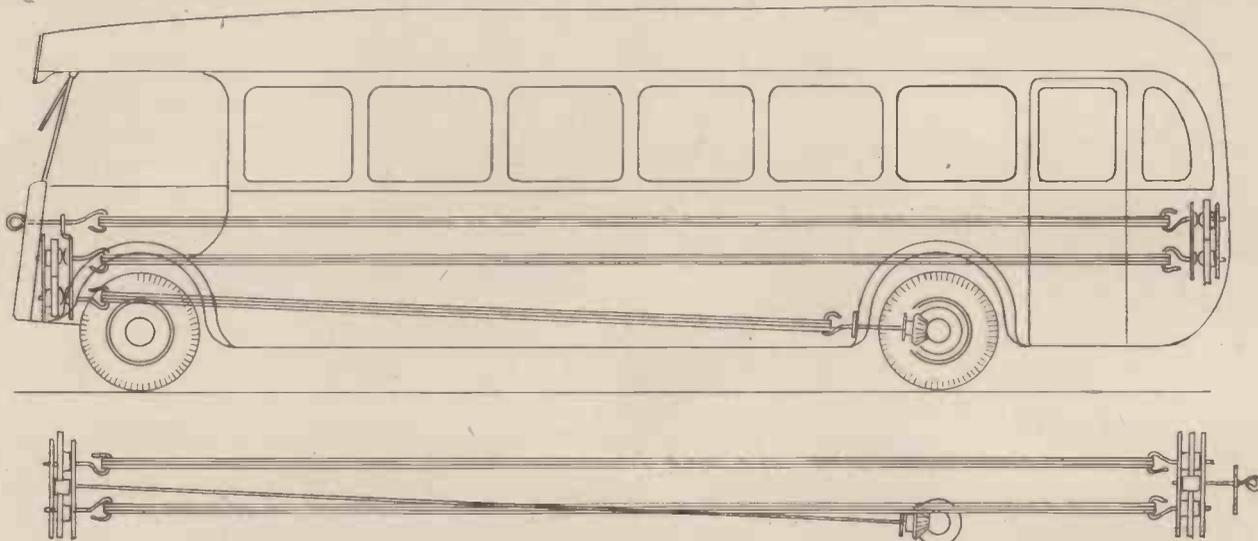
Showing the method of fitting an elastic motor to a model road coach. This type of motor can also be applied to model cars, motor buses, etc.
